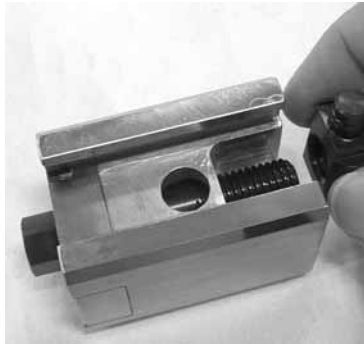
Press the clamp pad into the hole on the clamp leg or extension. The rubber o-ring holds the pad in place.
